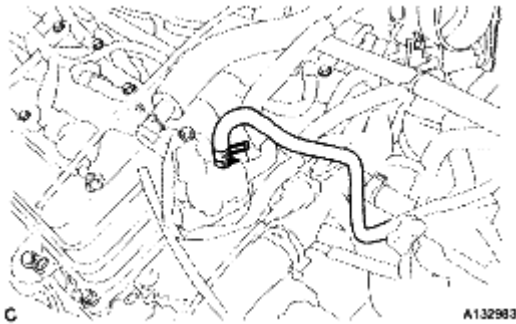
Identifying No. 1 Fuel Vapor Feed Hose Clamp
